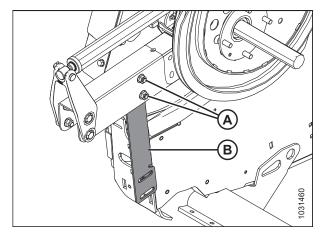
Outboard Reel Arm Support – D1X Header Shown
